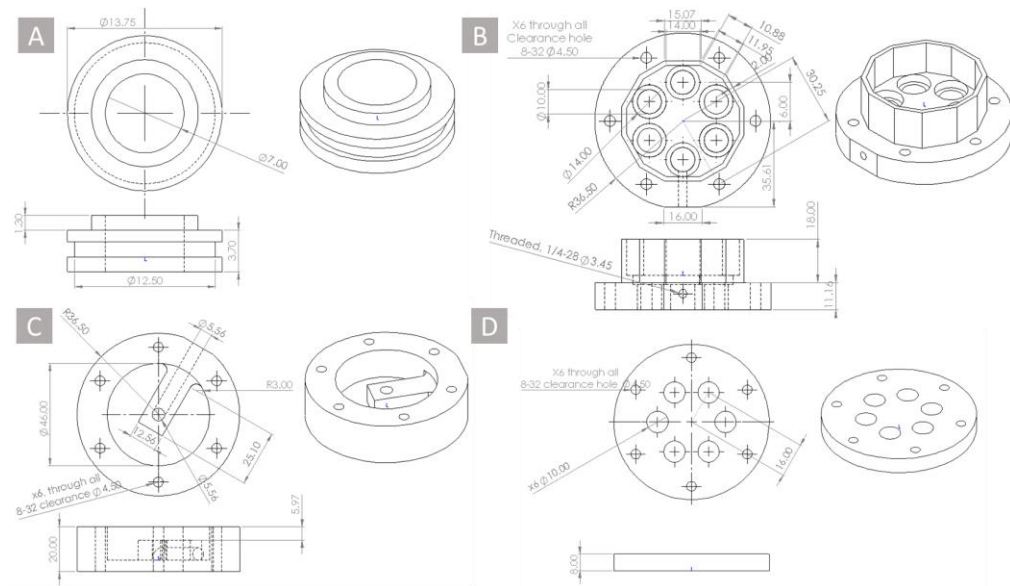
Technical drawings of CTCM parts. A- HDPE support ring with O-ring groove, B- Culture chamber, C- Air chamber, and D- middle plate.
